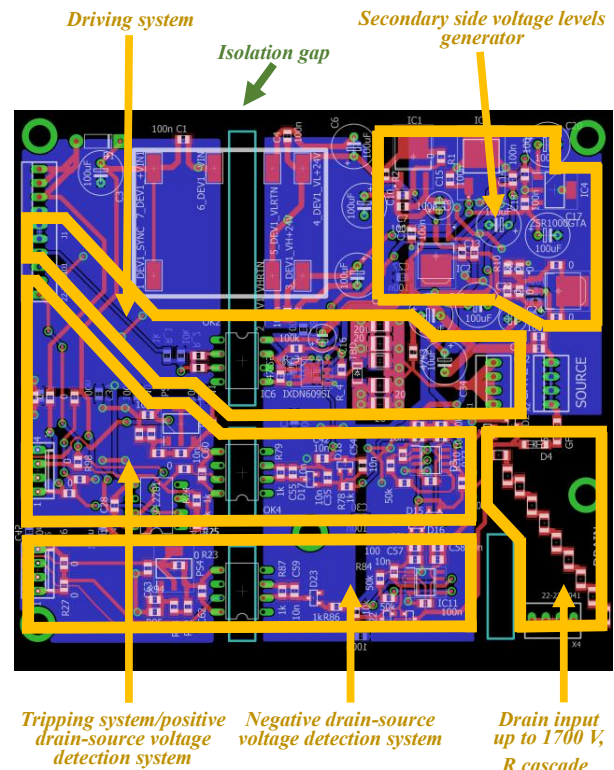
Proposed driver PCB design layout, Eagle export, blue color - bottom vias, red color - top vias.
